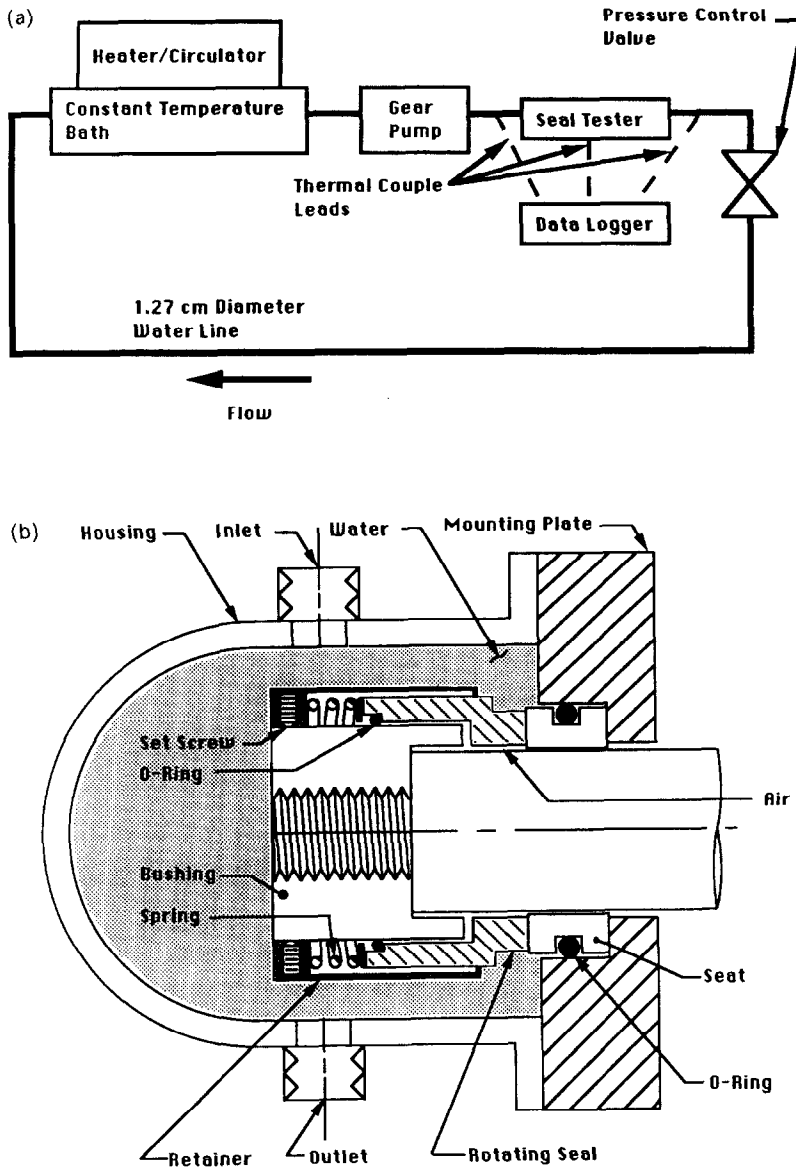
Schematic of the apparatus and the seal test chamber: (a) schematic of apparatus; (b) test chamber and seal assembly.
